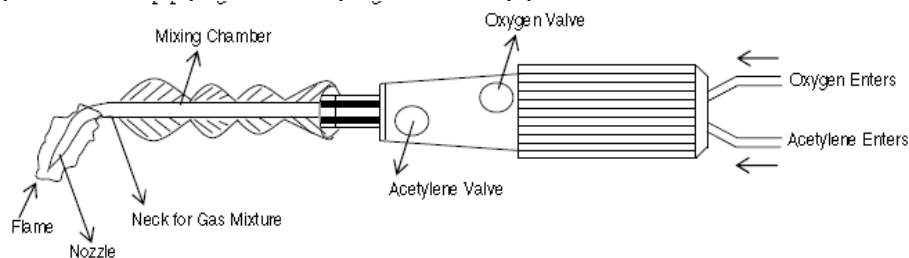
Blow Pipe Used in Gas Welding
